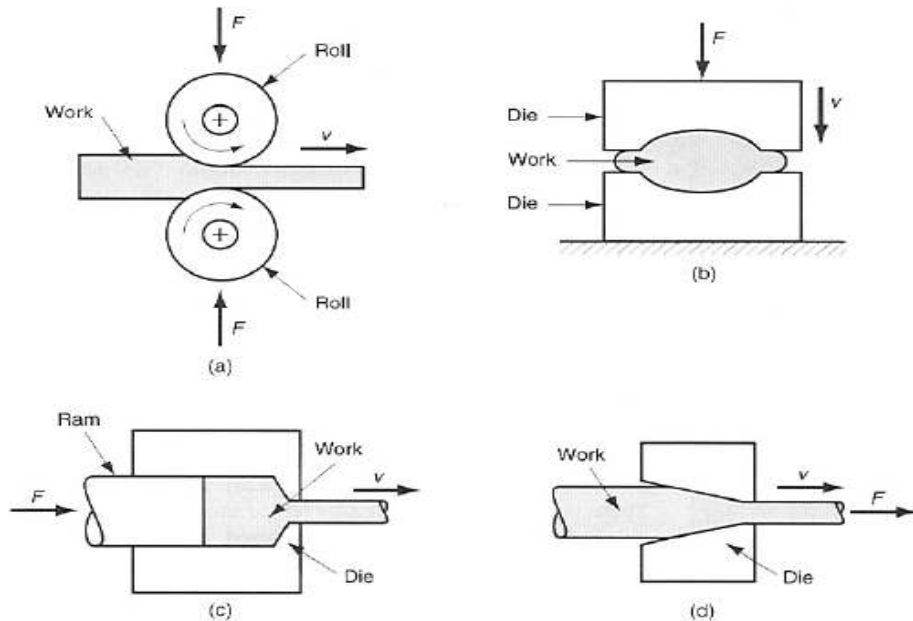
(a) Rolling, (b) forging, (c) extrusion, (d) drawing
